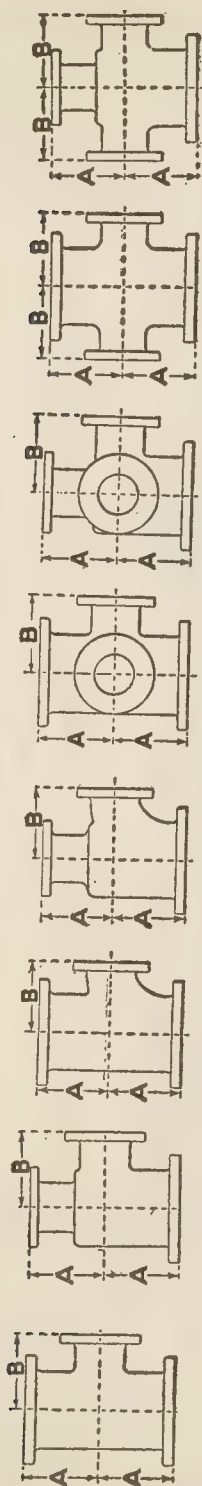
,758 to 7,773.—Various cast iron ferrosteel and cast steel extra heavy flange fittings; heavy sizes.
